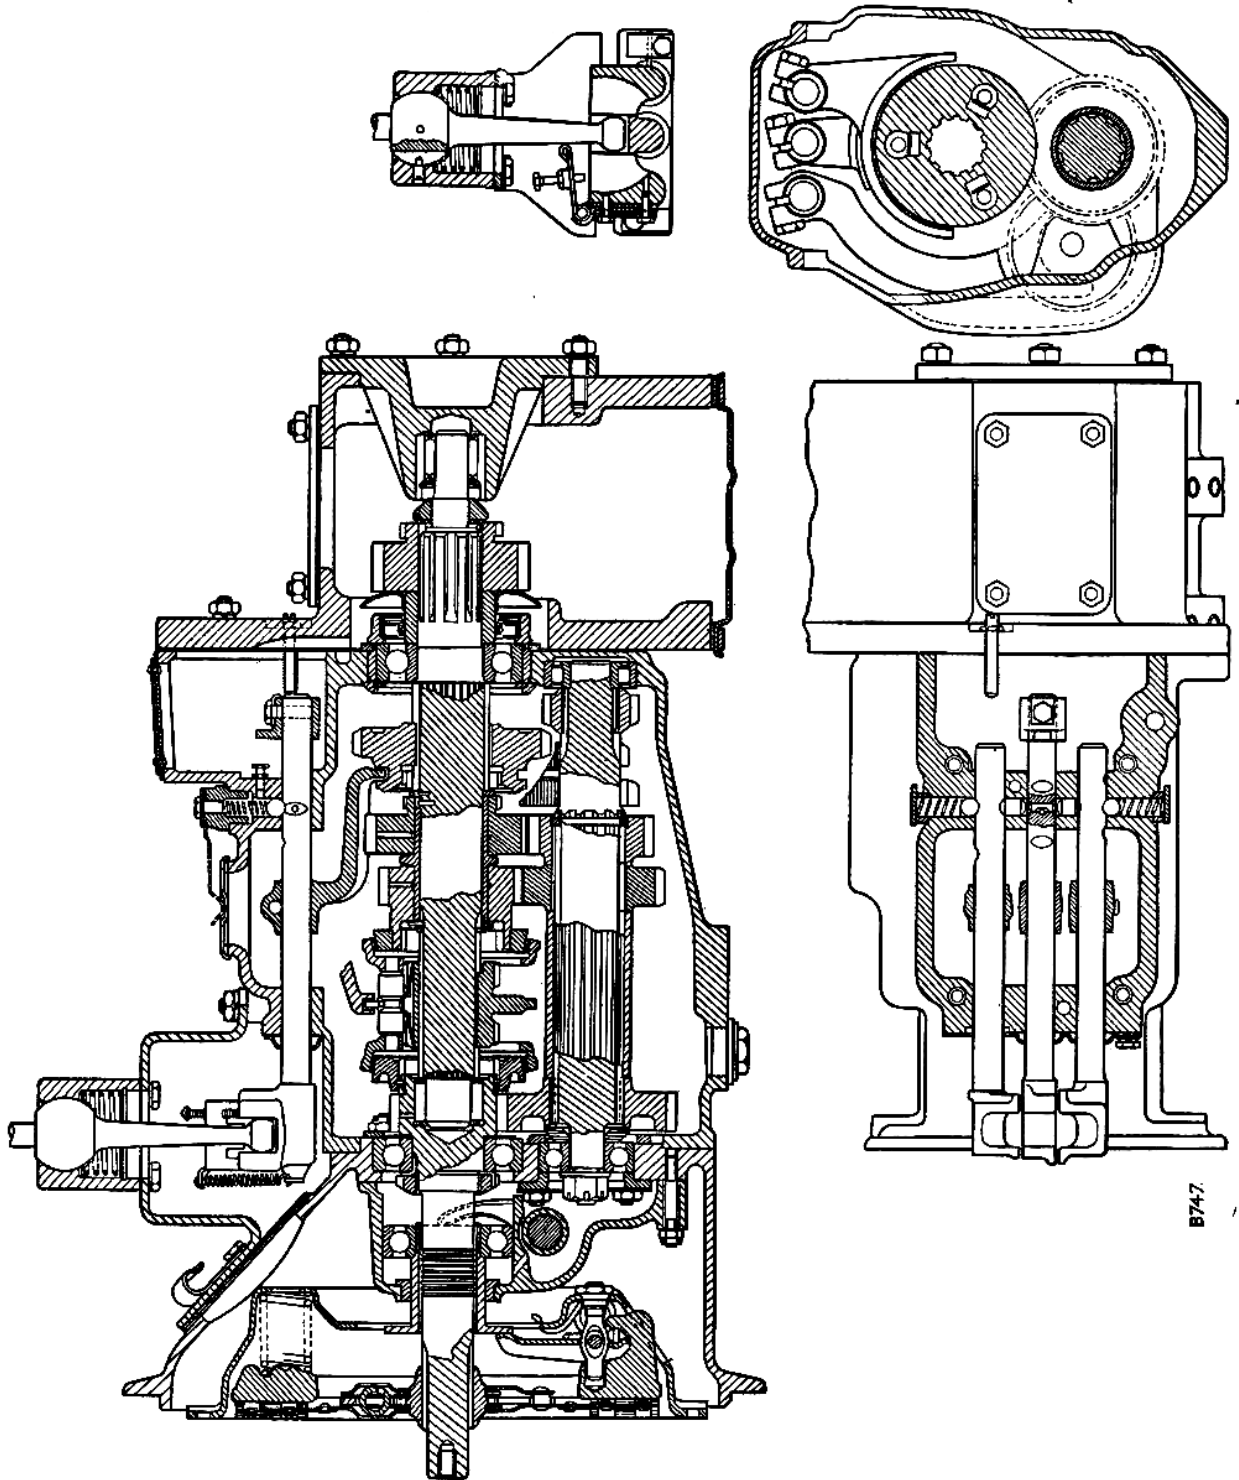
Layout of the gearbox unit: main gear change lever and selectors
